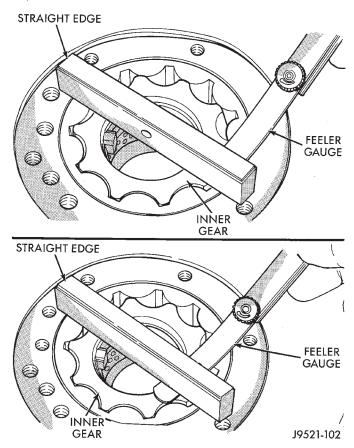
Checking Pump Gear End Clearance FRONT CLUTCH
